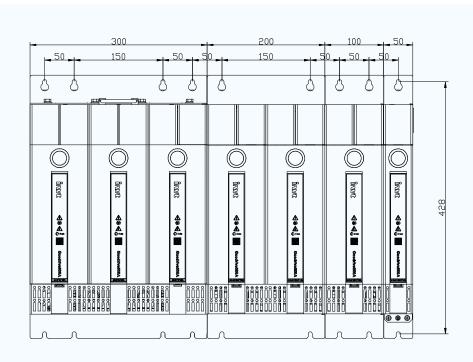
Flange mounting drawing for the 380V rectifier and inverter units
